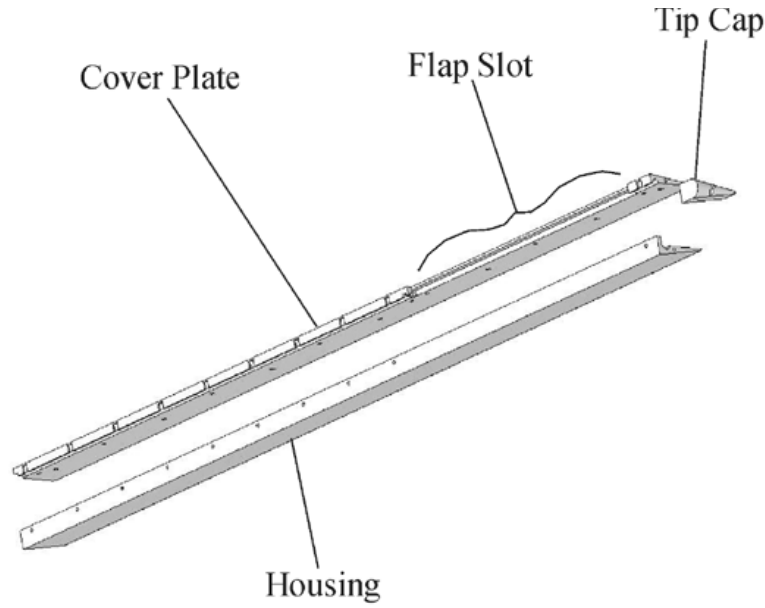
An exploded view of the housing, cover plate, and tip cap.
